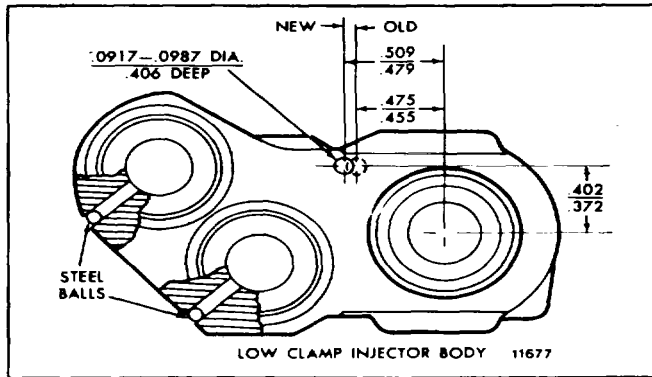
Relocating Timing Pin Hole in Injector Body
